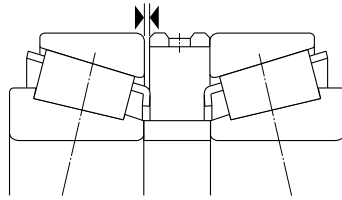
Internal axial clearance of a paired single row tapered roller bearing, [49].
